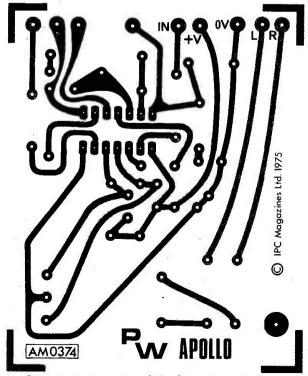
Printed circuit master of the Stereo Decoder Board shown full size.
